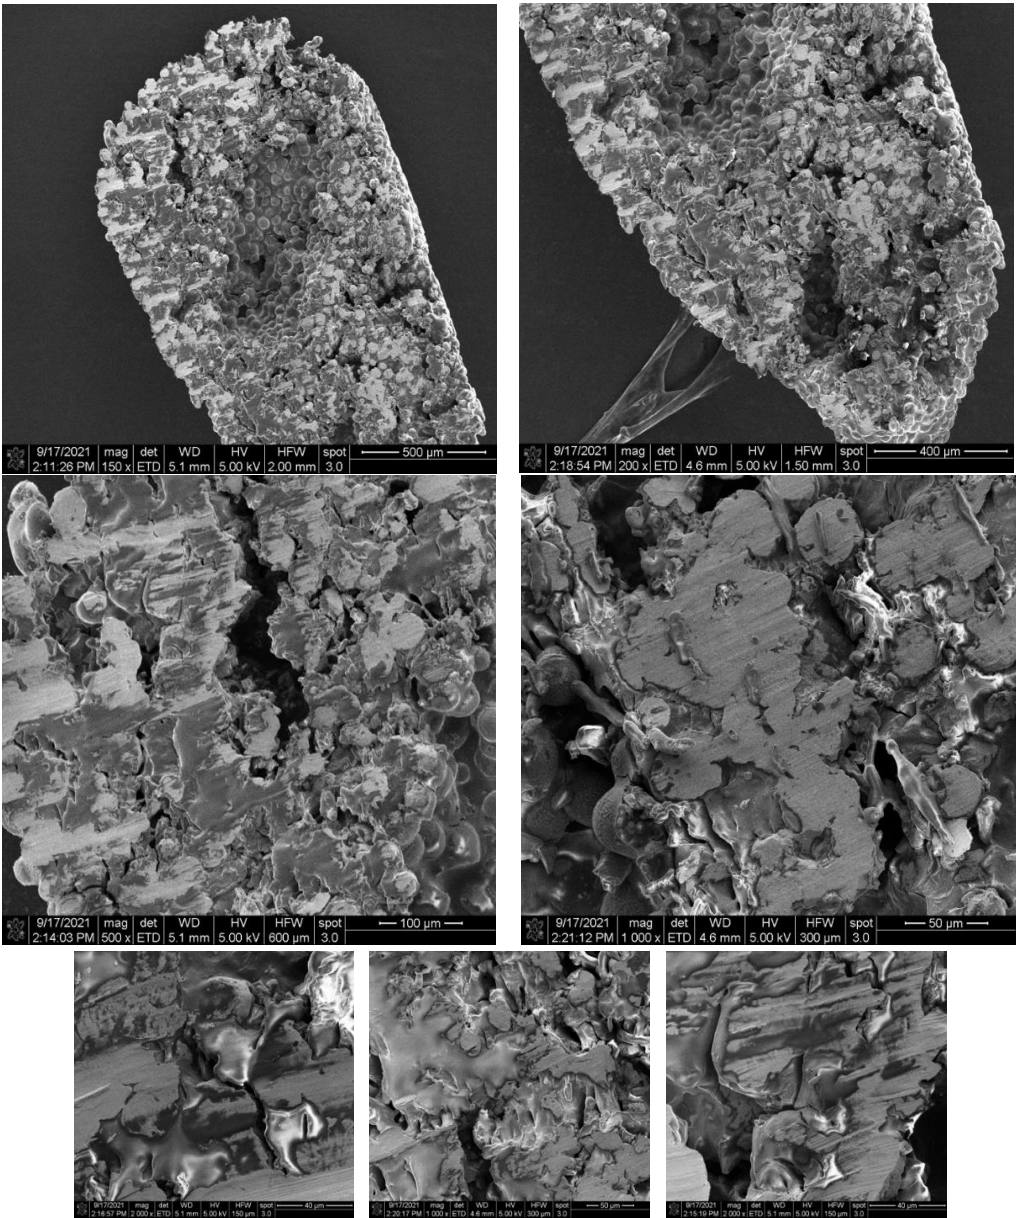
Fractured solder sample containing tin-indium Sn-82% annealed at 125°C for 15 minutes
